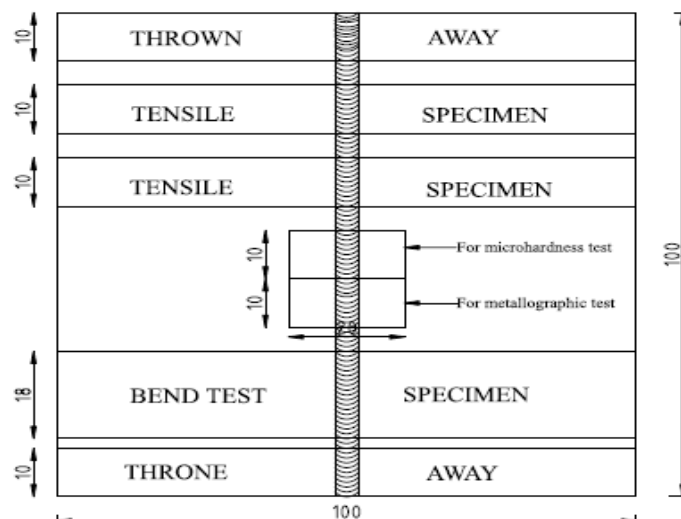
Weld sample plan for metallographic analysis and mechanical testing.
